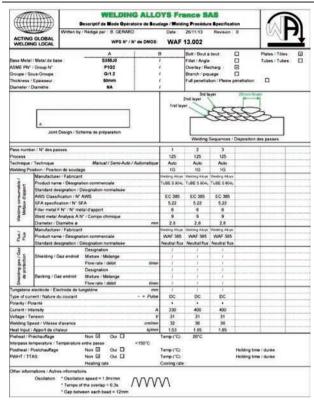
Submerged arc cladding with cored wire EC385. Welding procedure
